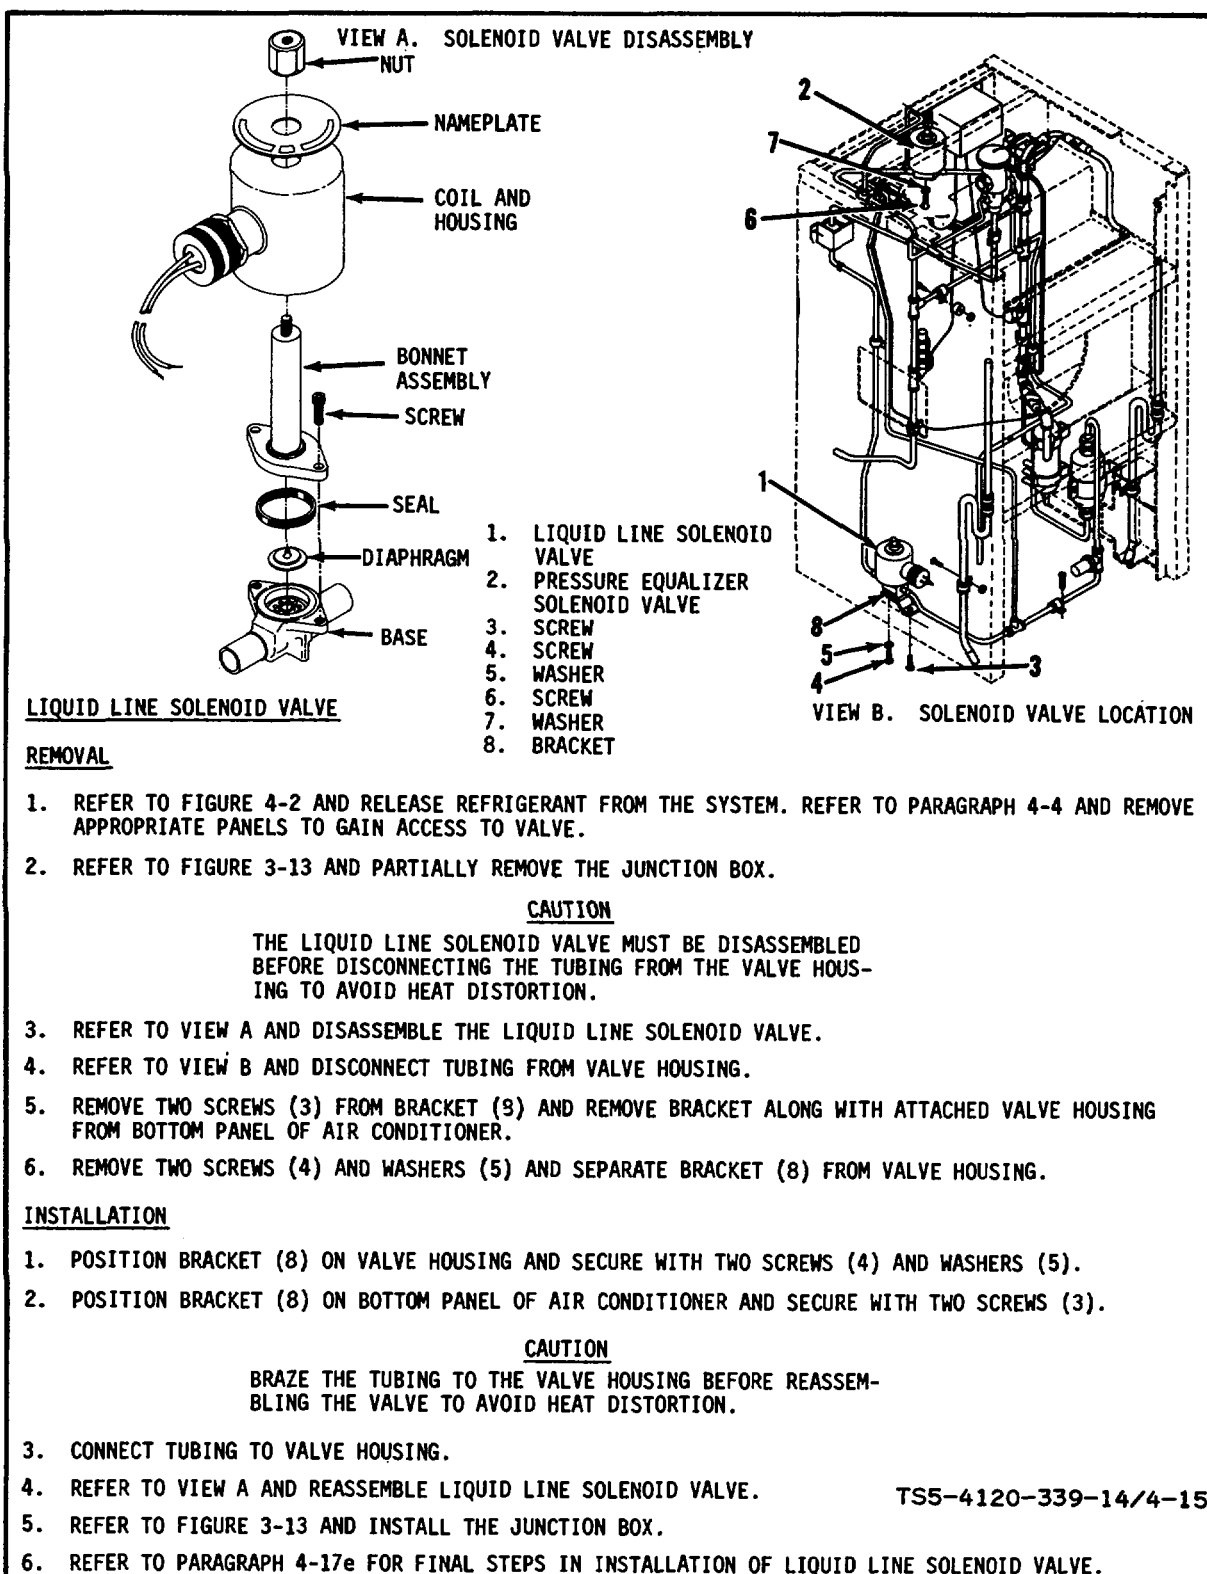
Removal and installation of solenoid valves (sheet 1 of 2)
